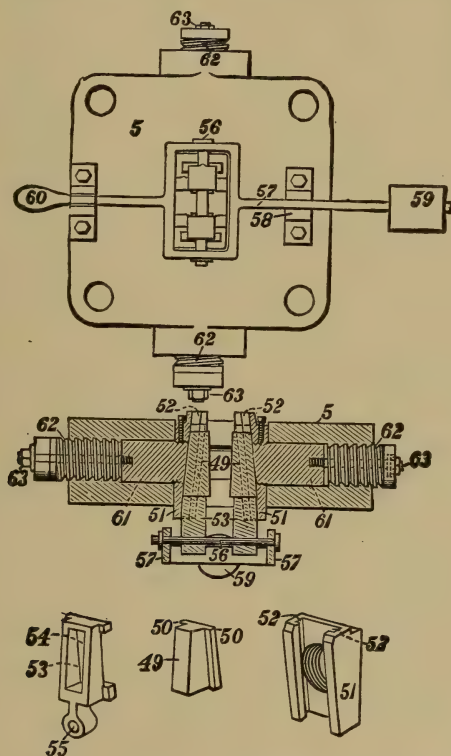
DRAW-HEAD TO OLSEN'S TESTING-MACHINE.
